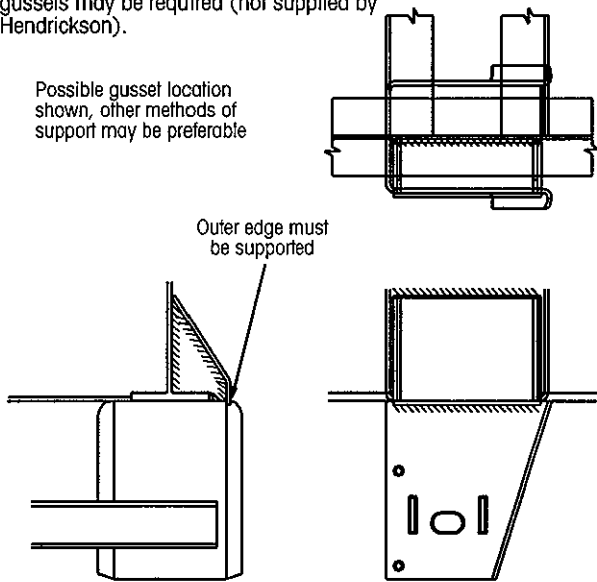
Frame bracket installation for QUIK-ALIGN® models with winged frame brackets.
